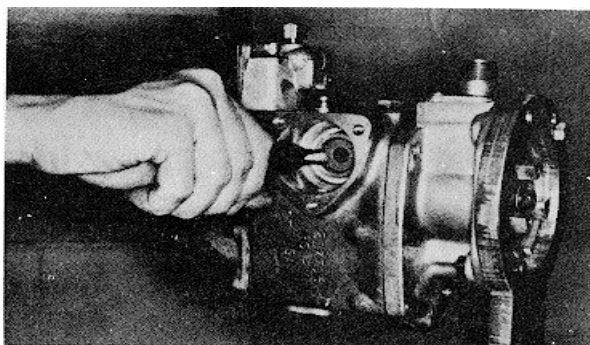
, F5304. Removing AFC barrel retaining ring.
